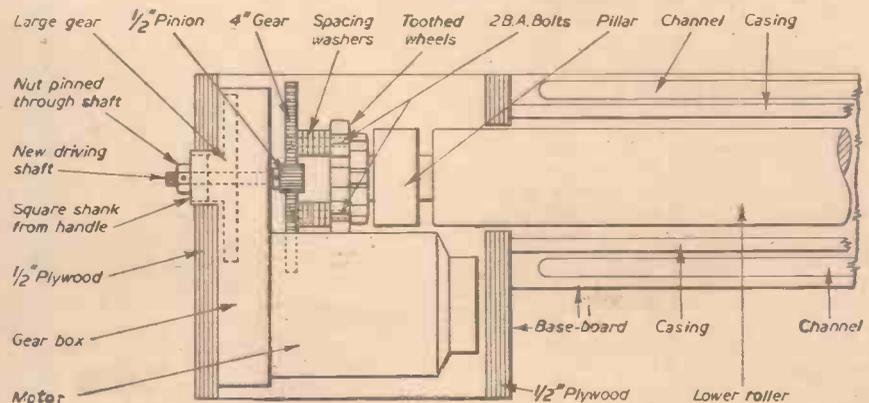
Enlarged plan view of motor unit and part of wringer.
